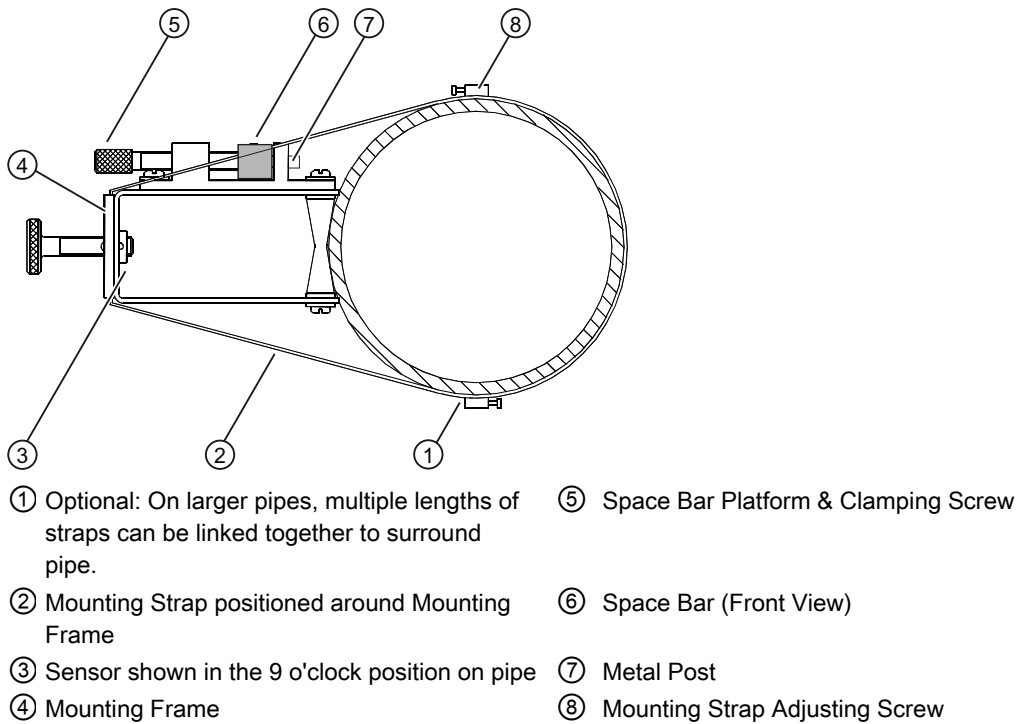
Reflect Mount with Mounting Frames and Spacer Bar (Front View)
